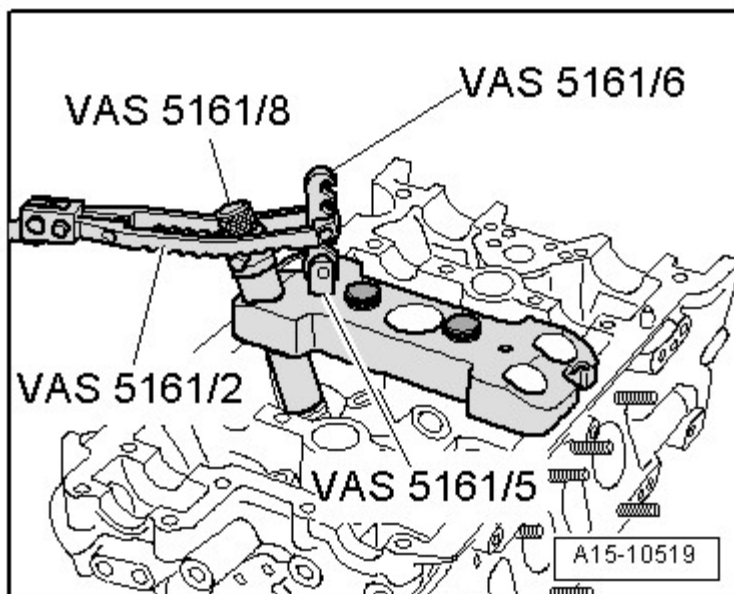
Identifying Engaging Device VAS 5161/6, Installation Fork VAS 5161/5 And Guide Plate, Removal/Installation
